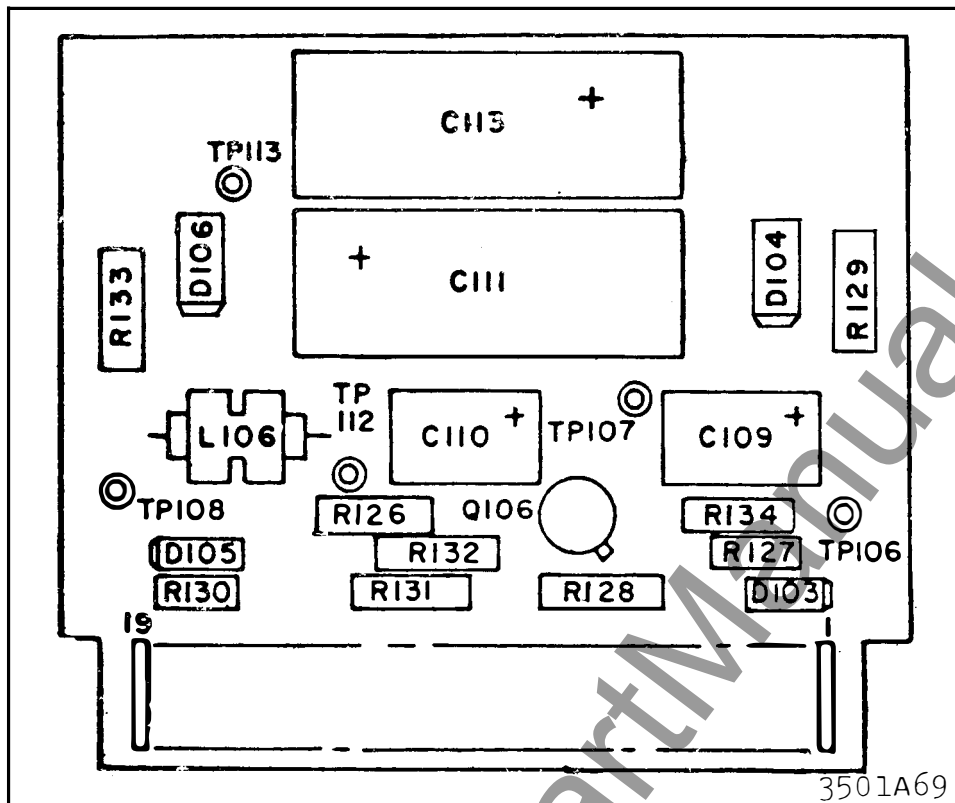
Power Amplifier Printed Circuit - Parts Location
